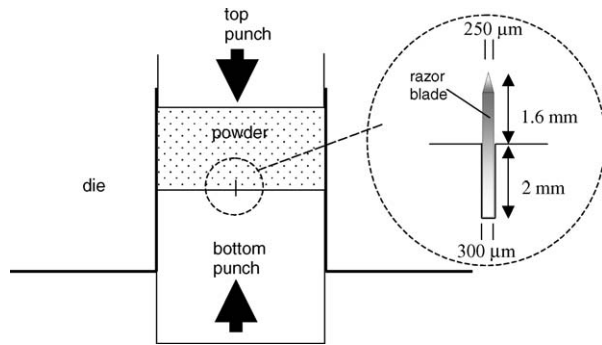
Schematic diagram of procedure used to produce SEVN diametrical compression specimens.
